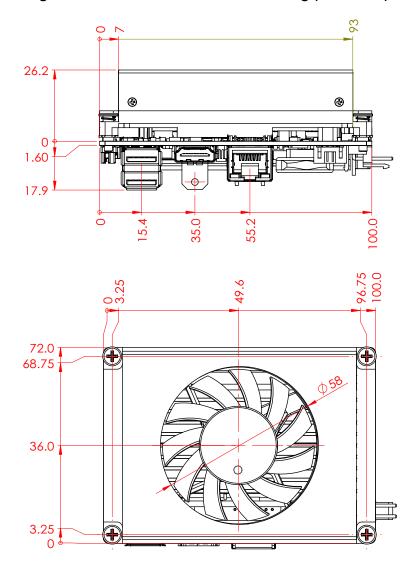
MIO-2364 Mechanical Drawing (with Cooler)
